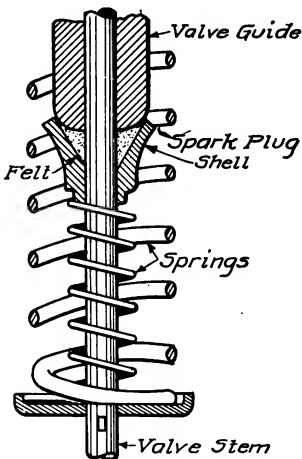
Remedy for Leaky Valve-Stem Guide, Using Old Spark Plug and Felt
